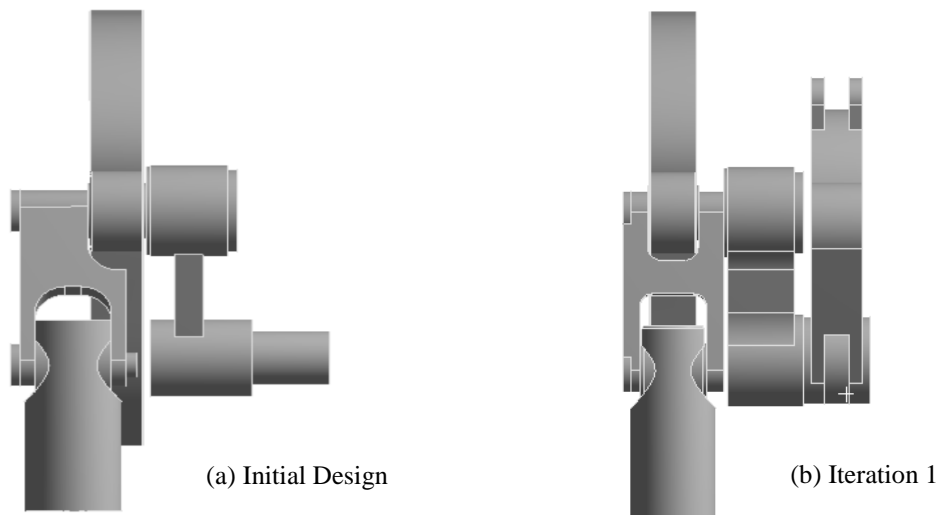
Top view of initial and iteration 1 cam pump assembly designs
